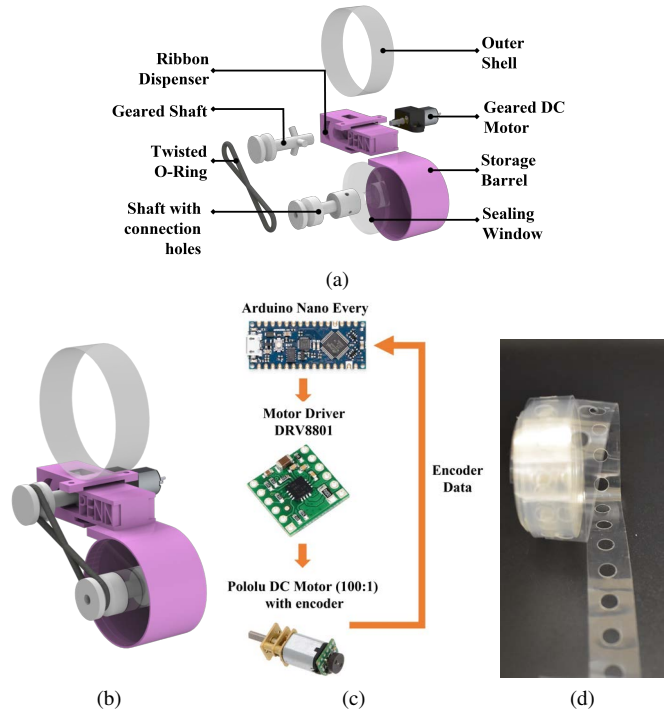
(a) Exploded view of tunable stiffness actuator design. (b) Actuator CAD model. (c) Electronics. (d) Balloon tape for coiled spring.
